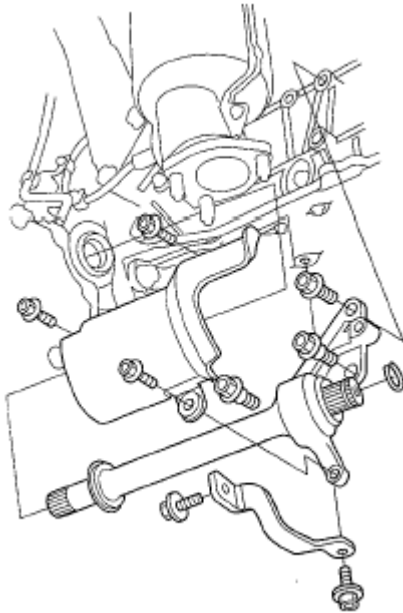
Identifying Exhaust Manifold Bracket And Heat Shield
